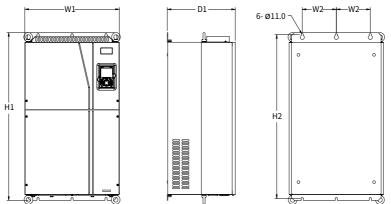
Outline and mounting dimensions of 380V 220–315kW VFD models
